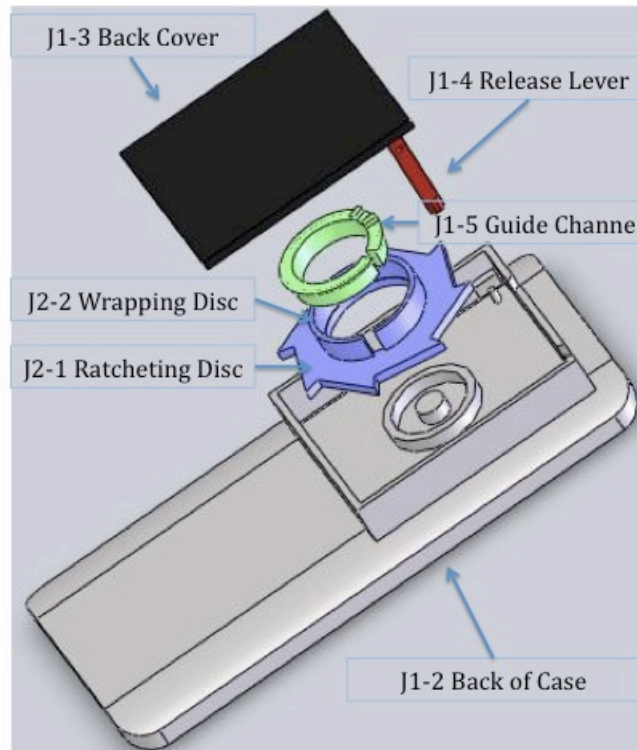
Exploded drawing of Tortoise Shell with parts labeled
